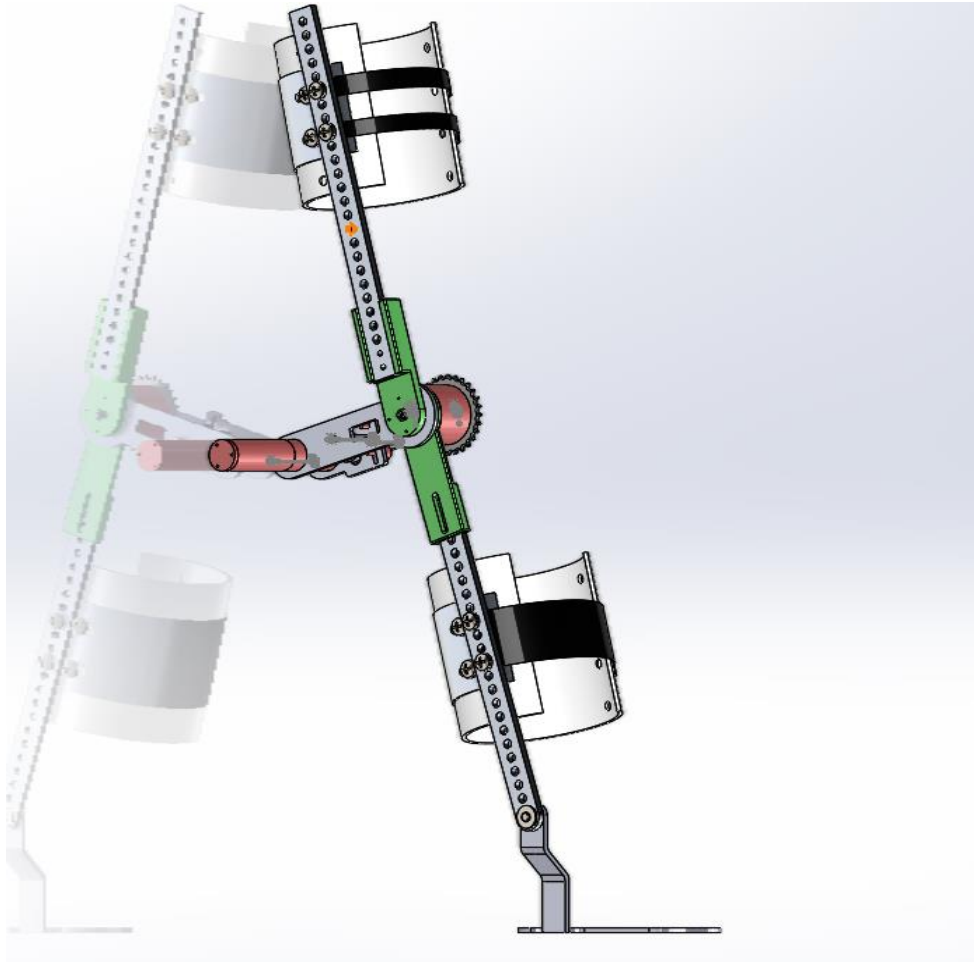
ISOMETRIC VIEW OF MOUNT
